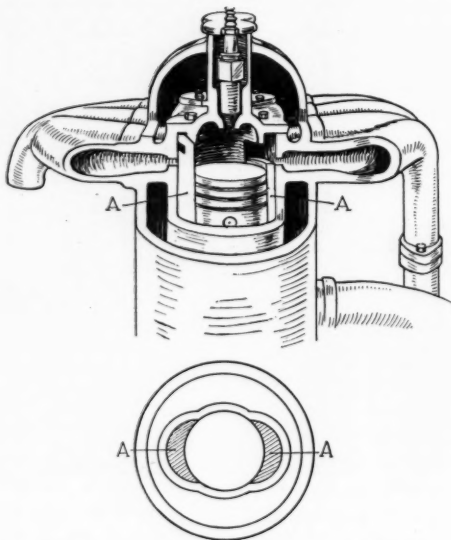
Cutout view of Fischer crescent-valve engine with sliding valves shown at A
